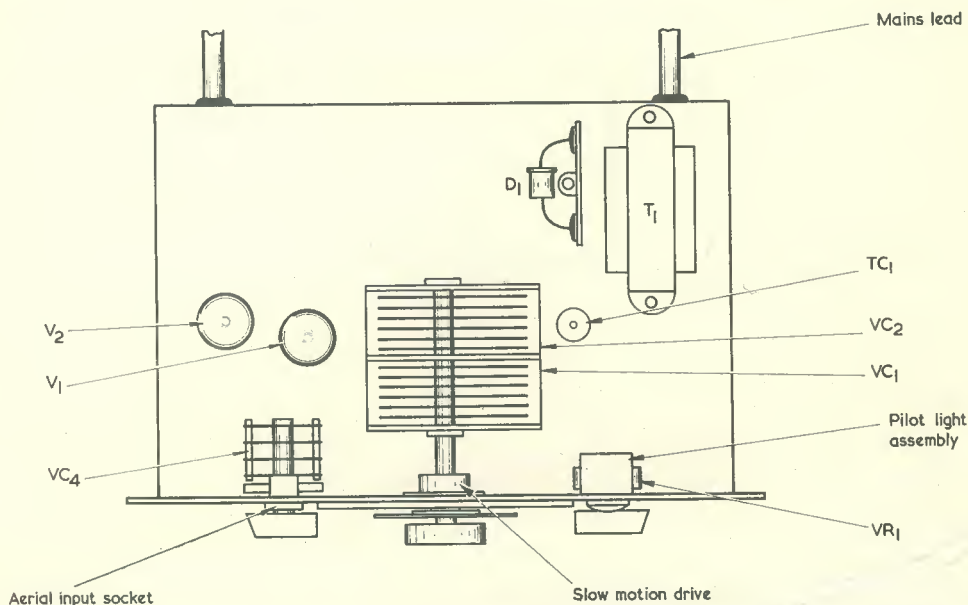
Top view of the prototype unit, showing the positions taken up by the main components.  $TC_1$  is soldered directly to the adjacent fixed vane tag of  $VC_2$
